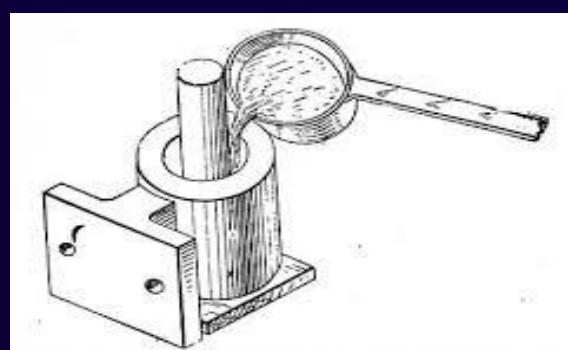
Simple Method of Pouring a Bearing in Vertical Position
